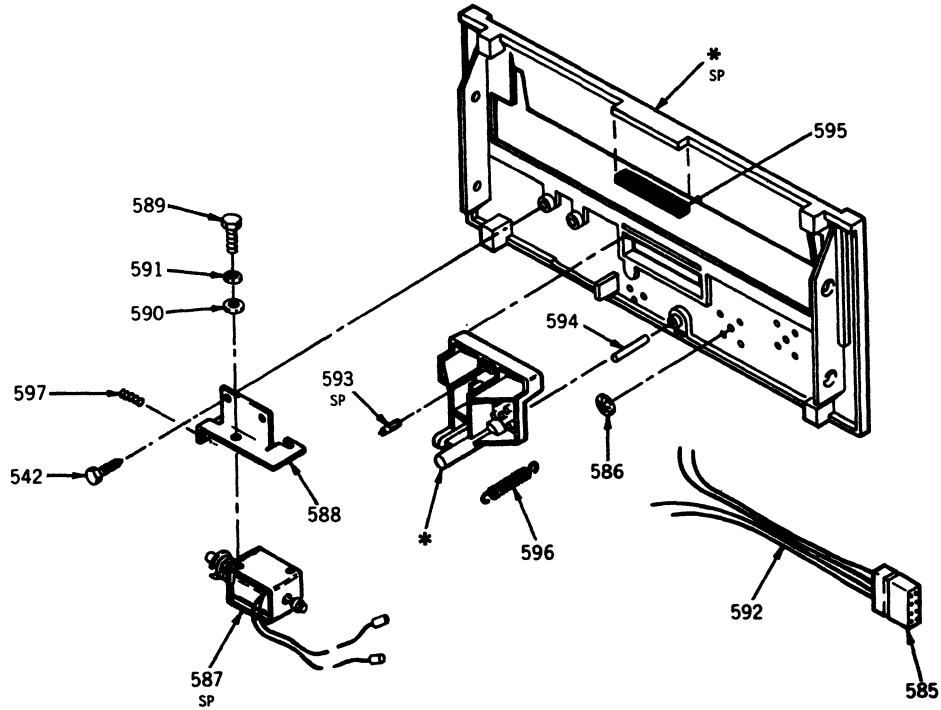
DRIVE MOTOR AND LIFTER ASSEMBLIES
